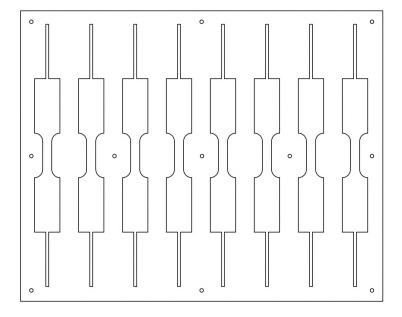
Molds for specimens for uni-axial tensile test drawn in Autocad, with the intension of 3D printing or laser-cutting plexiglas for assembly
